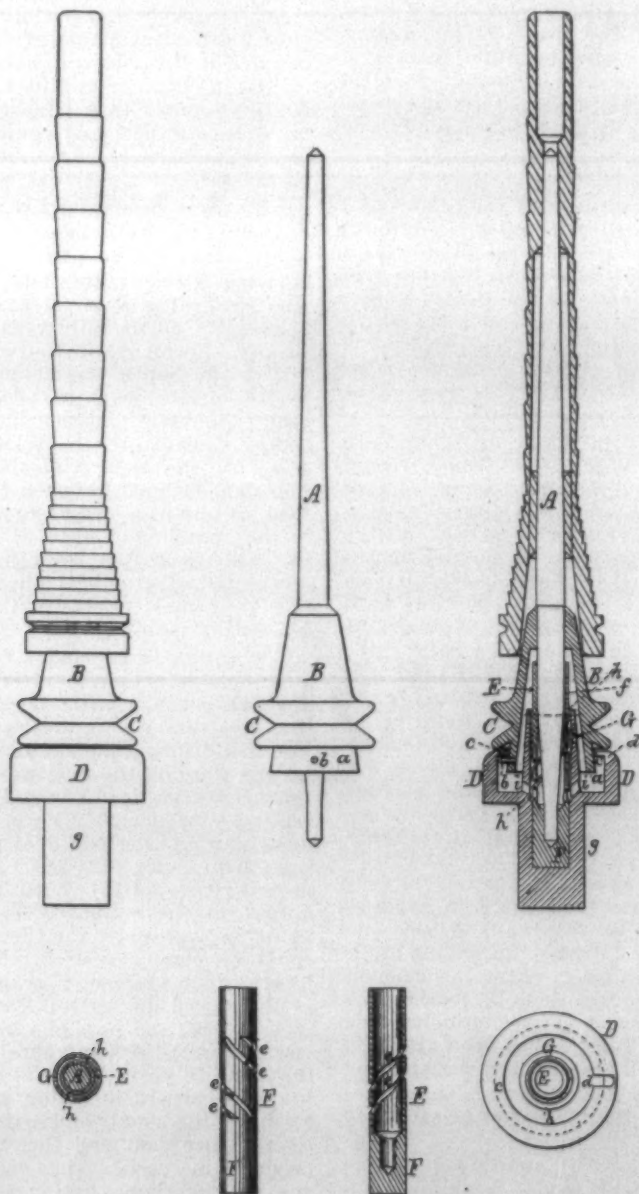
Birkenhead Spindle with an Elastic Bolster, 1878.
